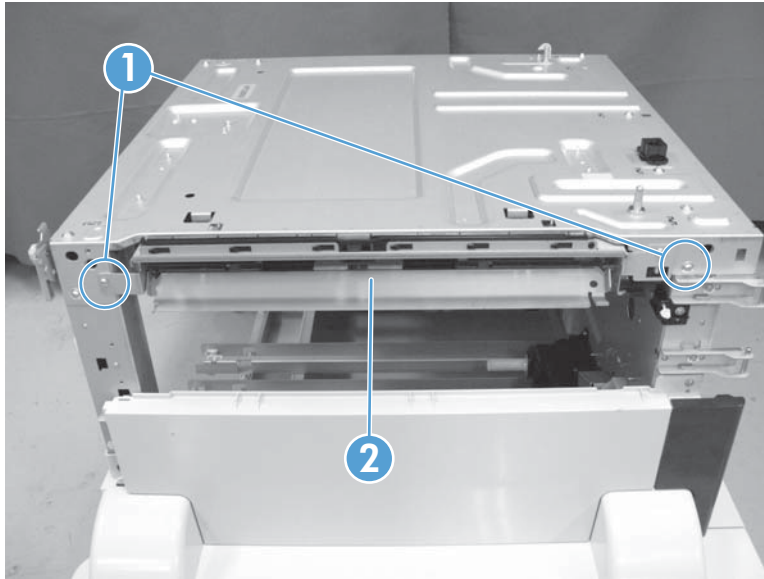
Remove the HCI merge assembly (1 of 2)
